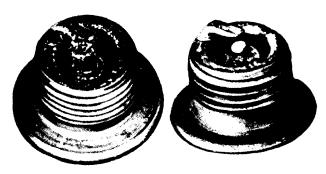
Faulty spark plugs. Left: cold plug used in an engine that should have a hot plug. Right: hot plug used in an engine that should have a cold plug. Spark plug electrodes will wear in the course of time and present day fuels have a tendency to form rusty-brown oxide deposits on the insulator tip. Therefore it is necessary to periodically clean the plugs with a plug cleaner and to reset the gaps to specifications.
